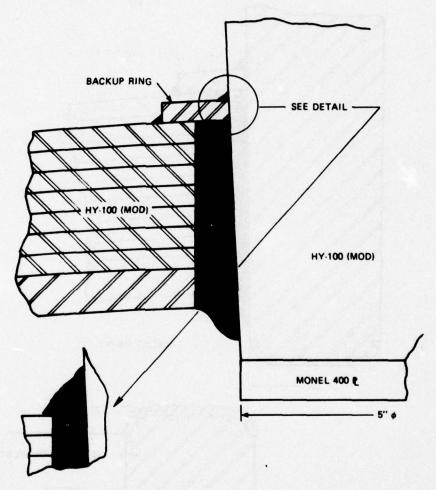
Welding Details for Welding Small Nozzles in Head
